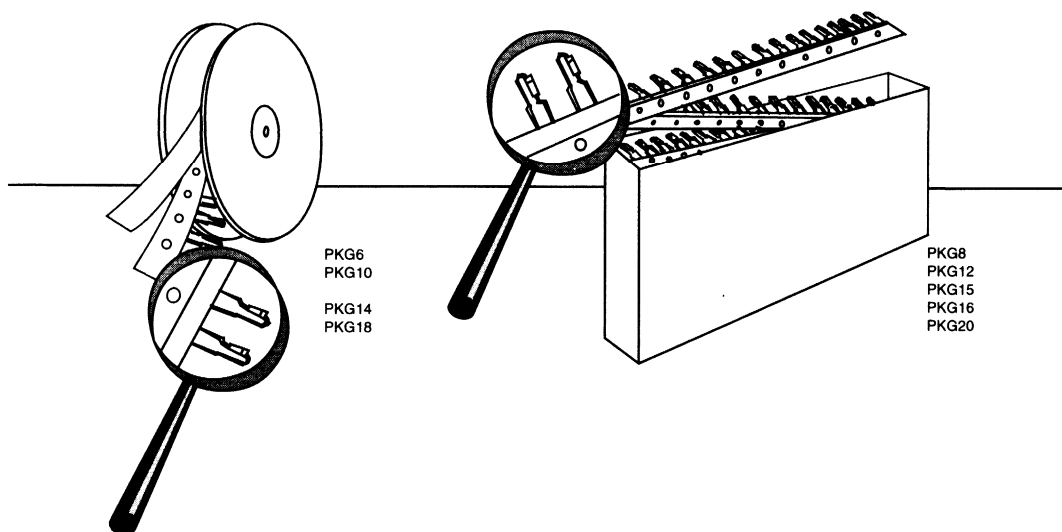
& 7 - REEL AND AMMO BOX PACKAGING
